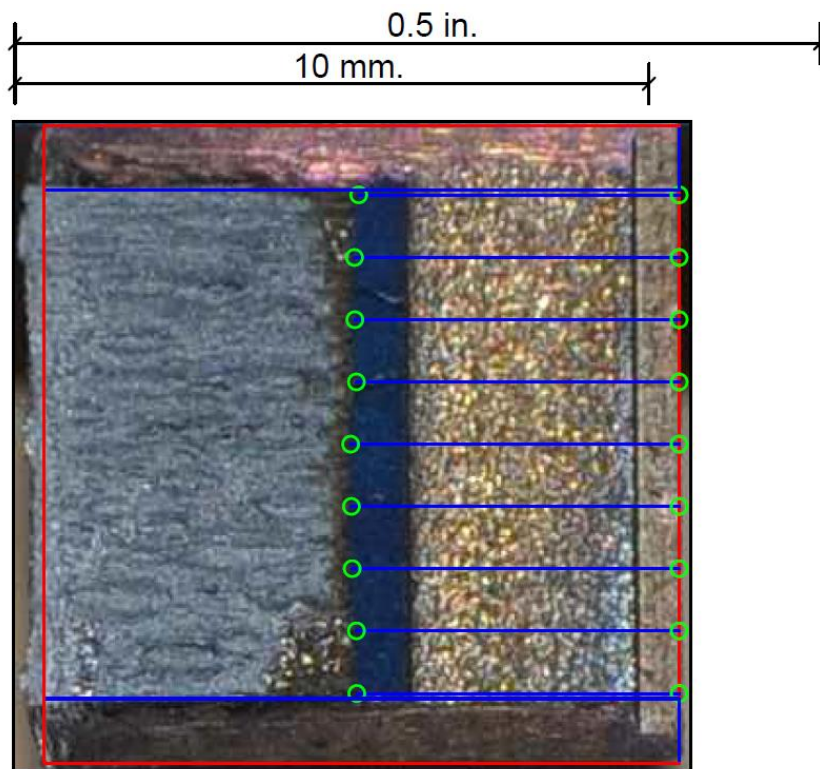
Specimen M5' Fracture Surface
